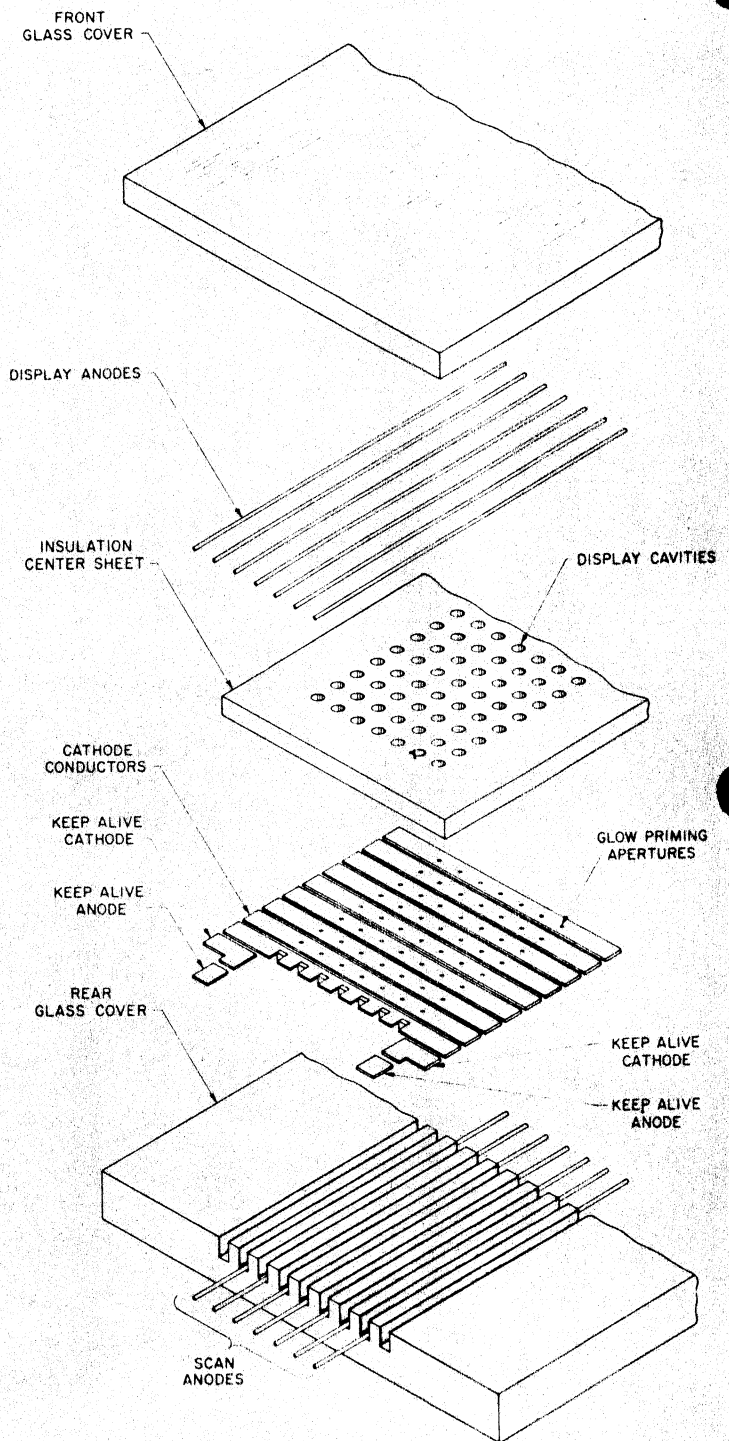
SELF-SCAN PANEL DISPLAY EXPLODED VIEW
